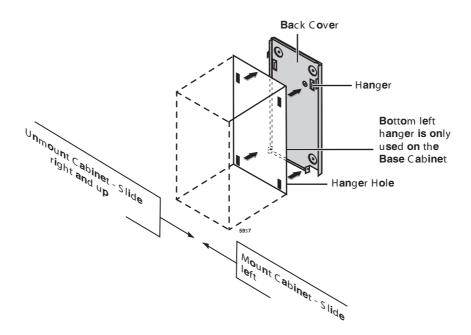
Mounting CTX100 Cabinet on Back Cover
